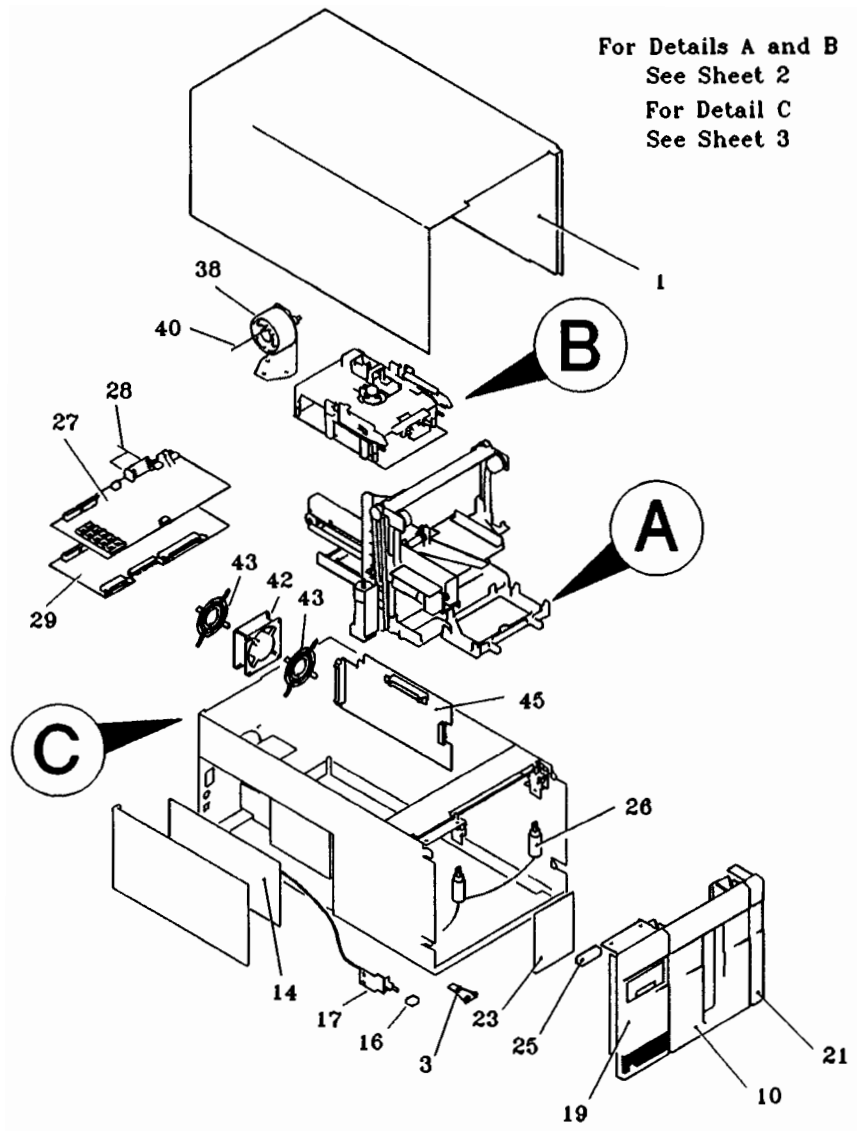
HP 35401 Exploded View (sheet 1 of 3)
